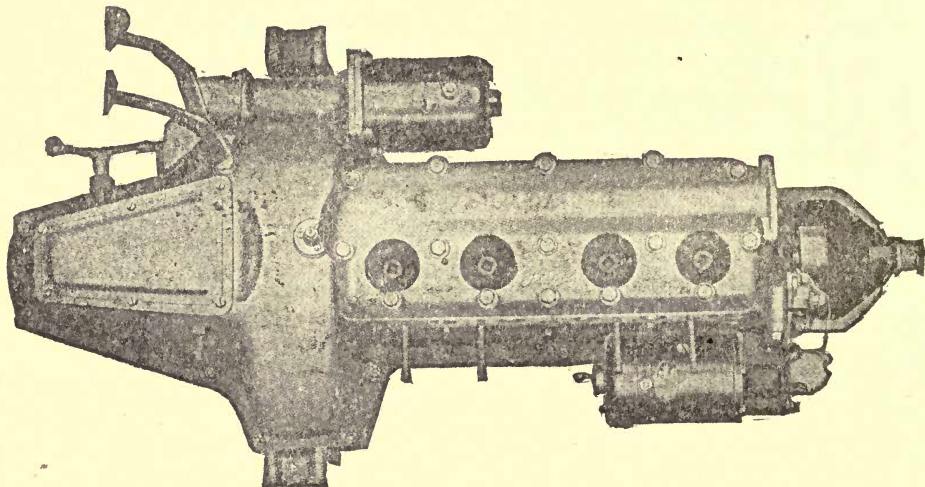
Top view of the Ford power plant, showing the generator mounted at the right front of the engine and the starting motor engaging the teeth of the flywheel through the transmission cover
